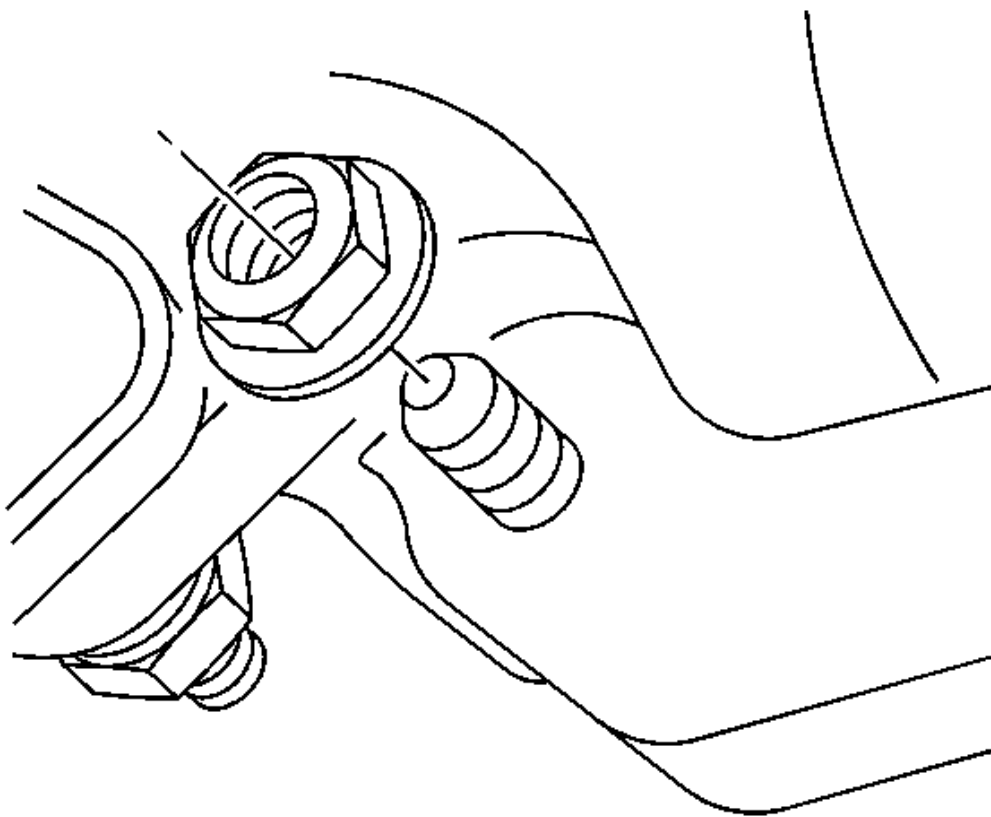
View Of Engine Mount Bracket-To-Engine Block Nuts
